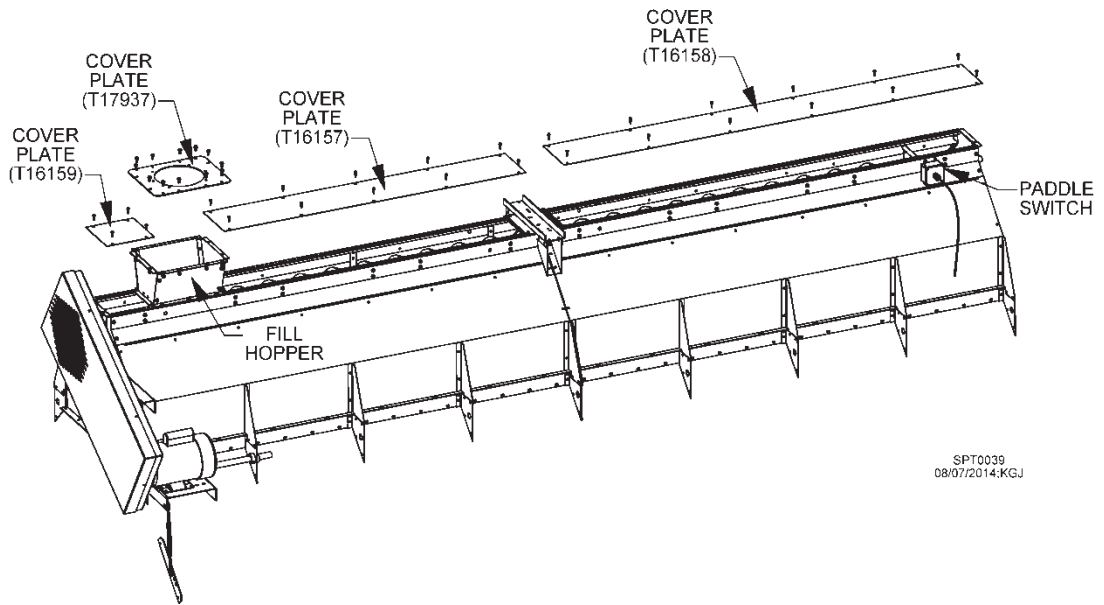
Fill hopper installation at front of wet bin (16' dryer shown)
